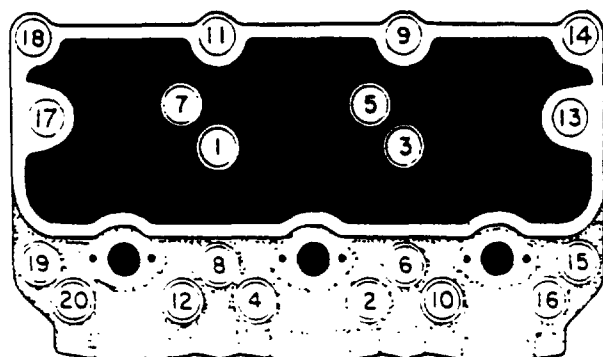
Cylinder Head Stud Nut Tightening Sequence
